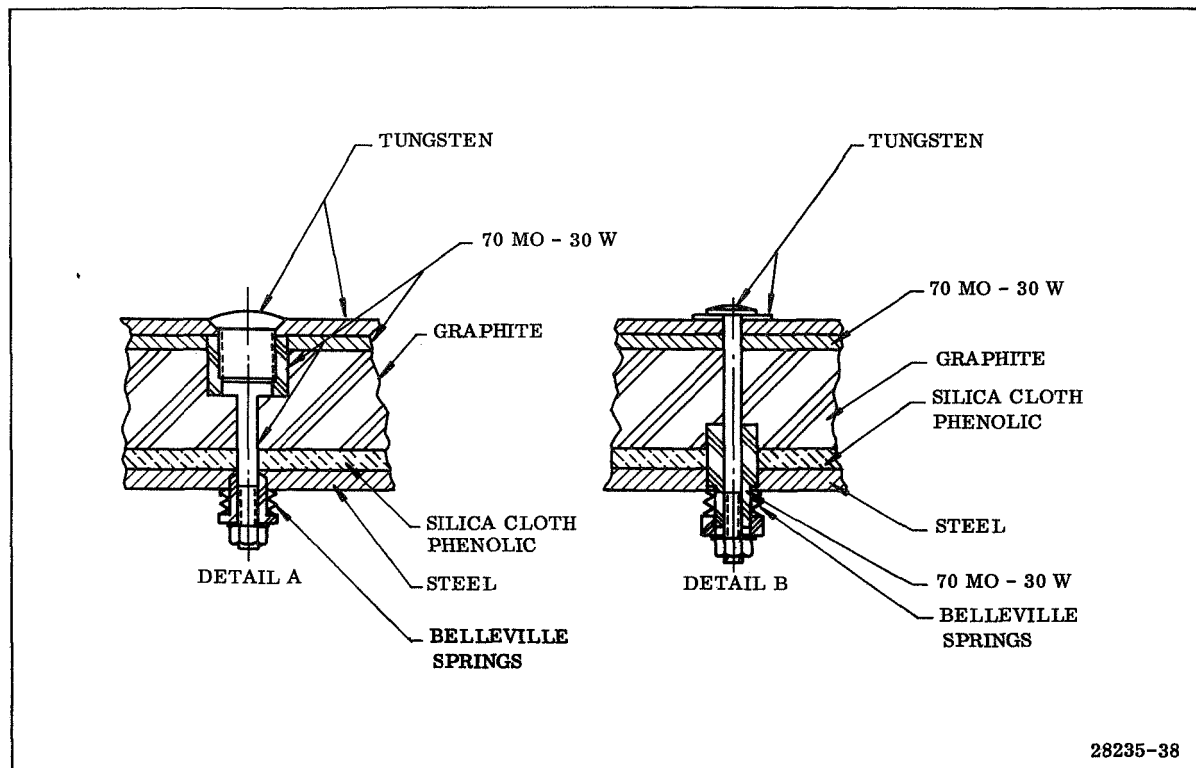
Typical Jet Tab Face Plate Retention Configuration
